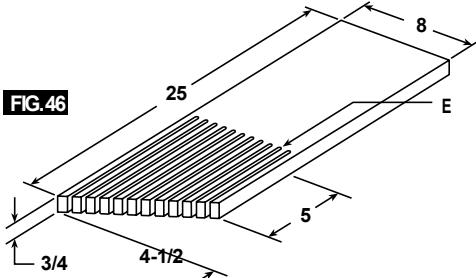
illustrates dimensions for making a typical feather board . It should be made from a straight piece of wood that is free of knots or cracks . Kerf E should be about 1/4" apart (Fig . 46) .
